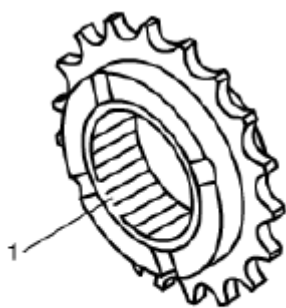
Identifying RH (No. 2) Bank 1st Timing Chain Intake Camshaft Sprocket
